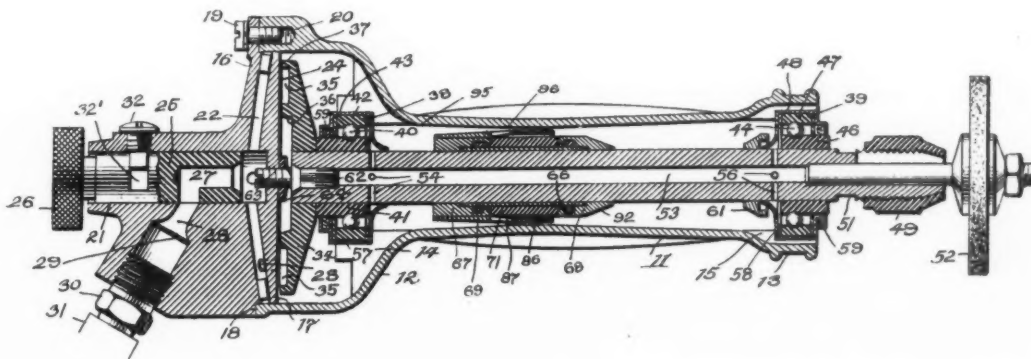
Pneumatic grinder employs governor embodying rubber sleeve which is controlled by centrifugal force to prevent racing of the tool and possible breakage
